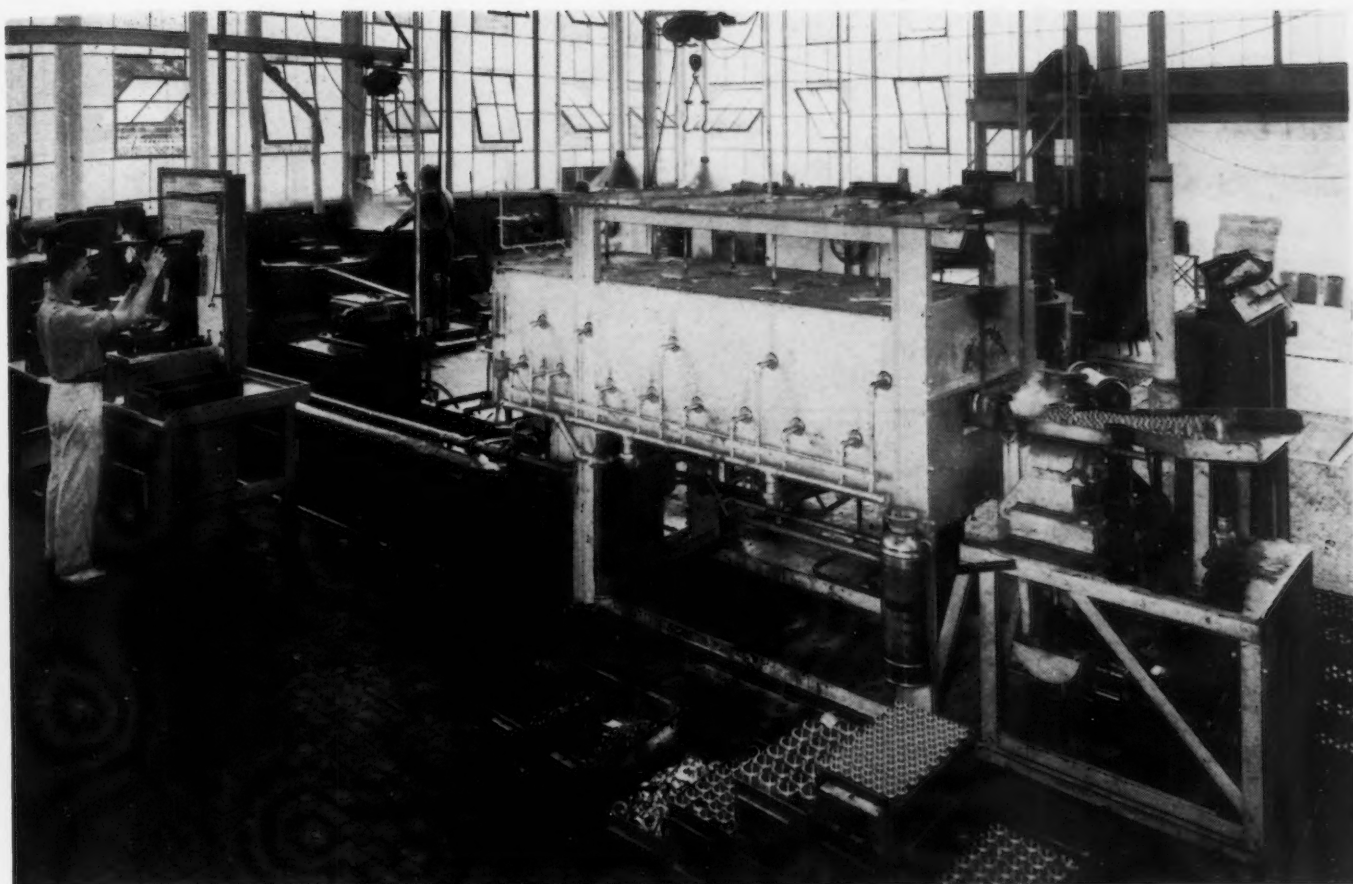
View of reciprocating full length muffle and quench tank for Ni-Carbing and hardening previously carburized chuck parts. Tote boxes in the foreground hold typical parts sent through this continuous furnace which has a gas curtain at the charging end. A percentage of the products is checked for hardness on the Rockwell tester at the left. Furnace control apparatus, air blower, gas pump and ammonia tanks are on the far side of the furnace.
